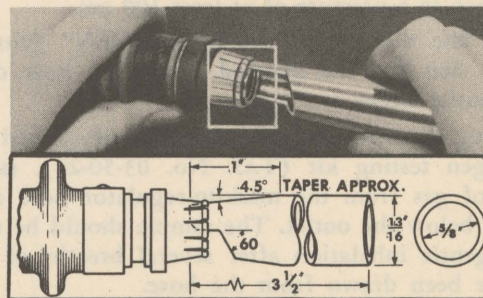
Spreader Tool, ATSC Drawing No. 44A1325
